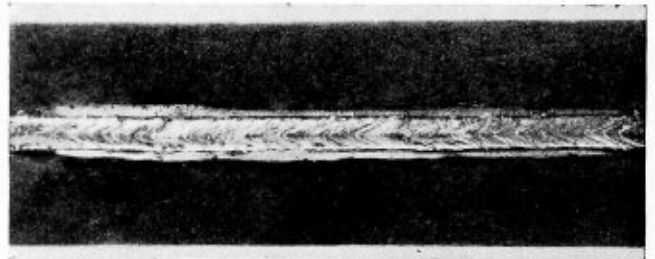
Weld made by electronic tornado process on 1/2 inch plate
